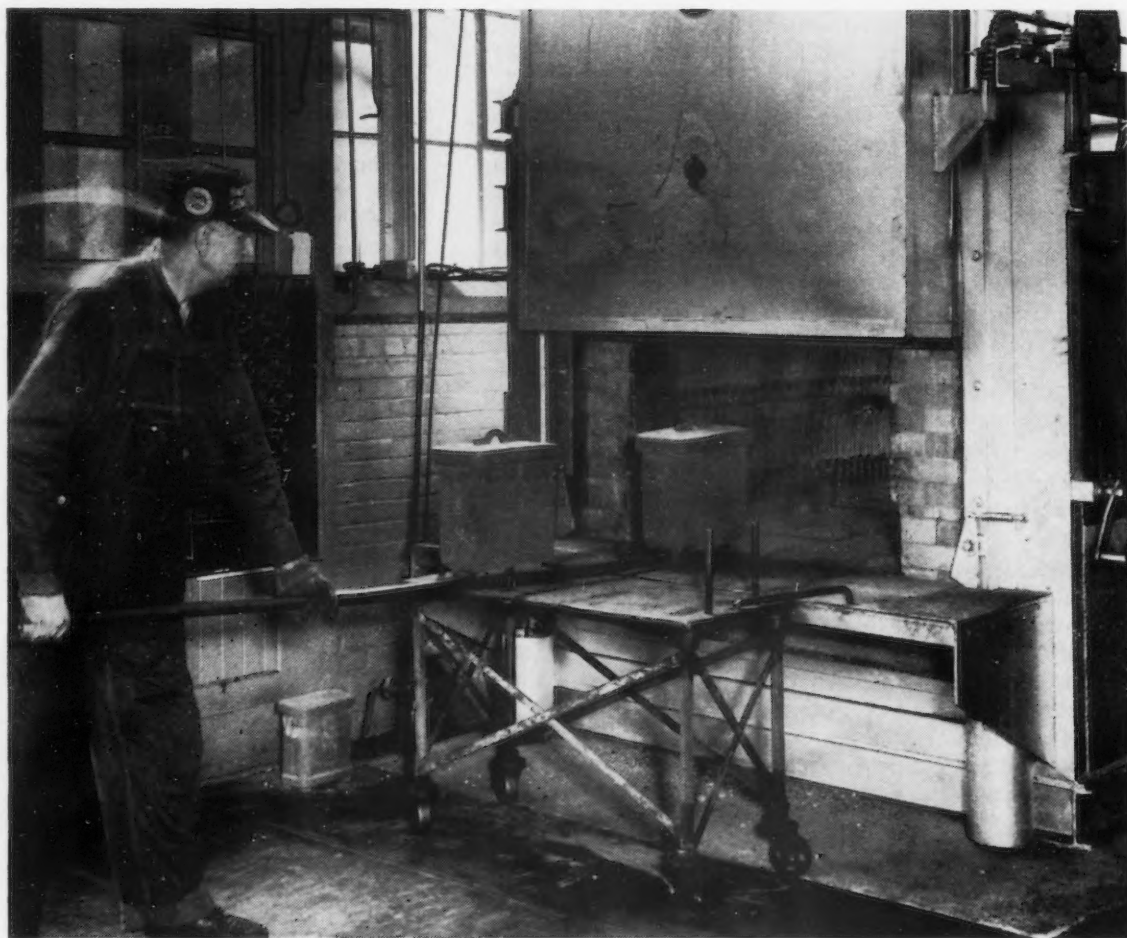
Pulling pack carburizing boxes out of an electric furnace onto a cast-iron truck, which is linked to the furnace apron during the unloading operation. Truck is pushed through door at left to cool outside under protective roof.
